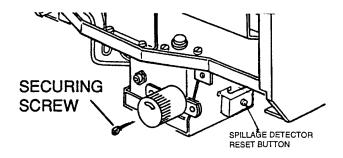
ACCESS TO THE BOILER ELECTRICAL TERMINAL BLOCK
